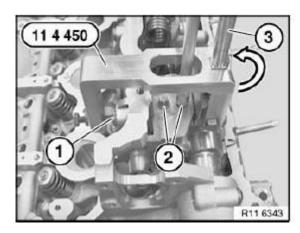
Identifying Eccentric Lever, Screws And Special Tool Courtesy of BMW OF NORTH AMERICA, INC.
